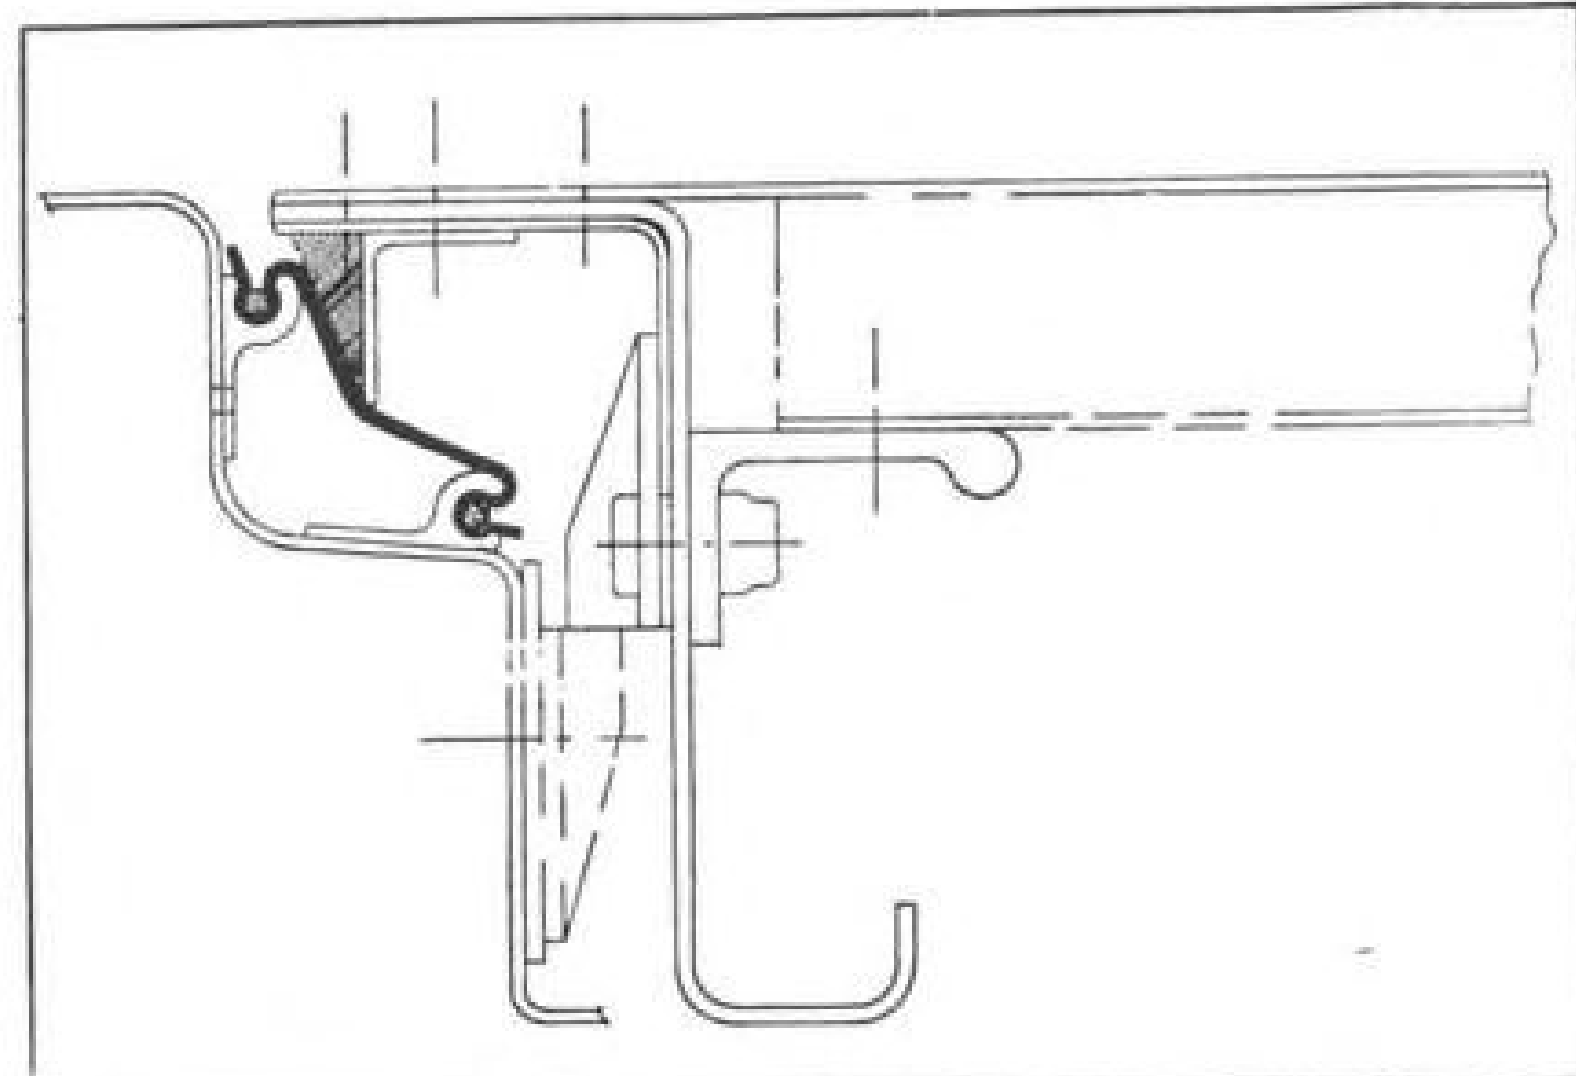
Door and hatch seal—easily replaceable sheet or strip material—is held against locating blocks and inflated by cabin pressure.
